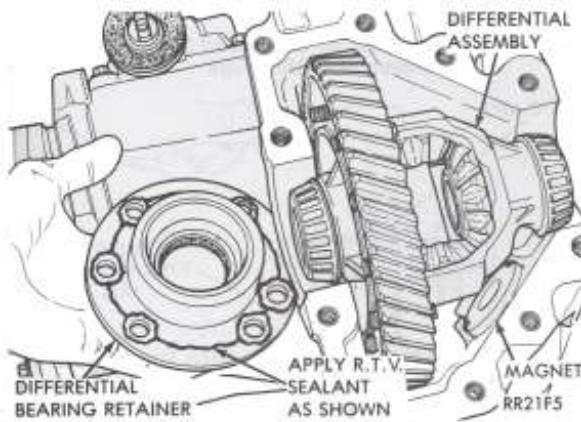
Remove or Install Differential Bearing Retainer (A-520/A-555)
